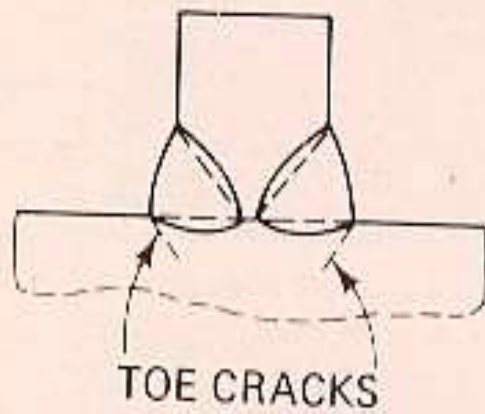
Weld toe cracks and underbead cracks.
